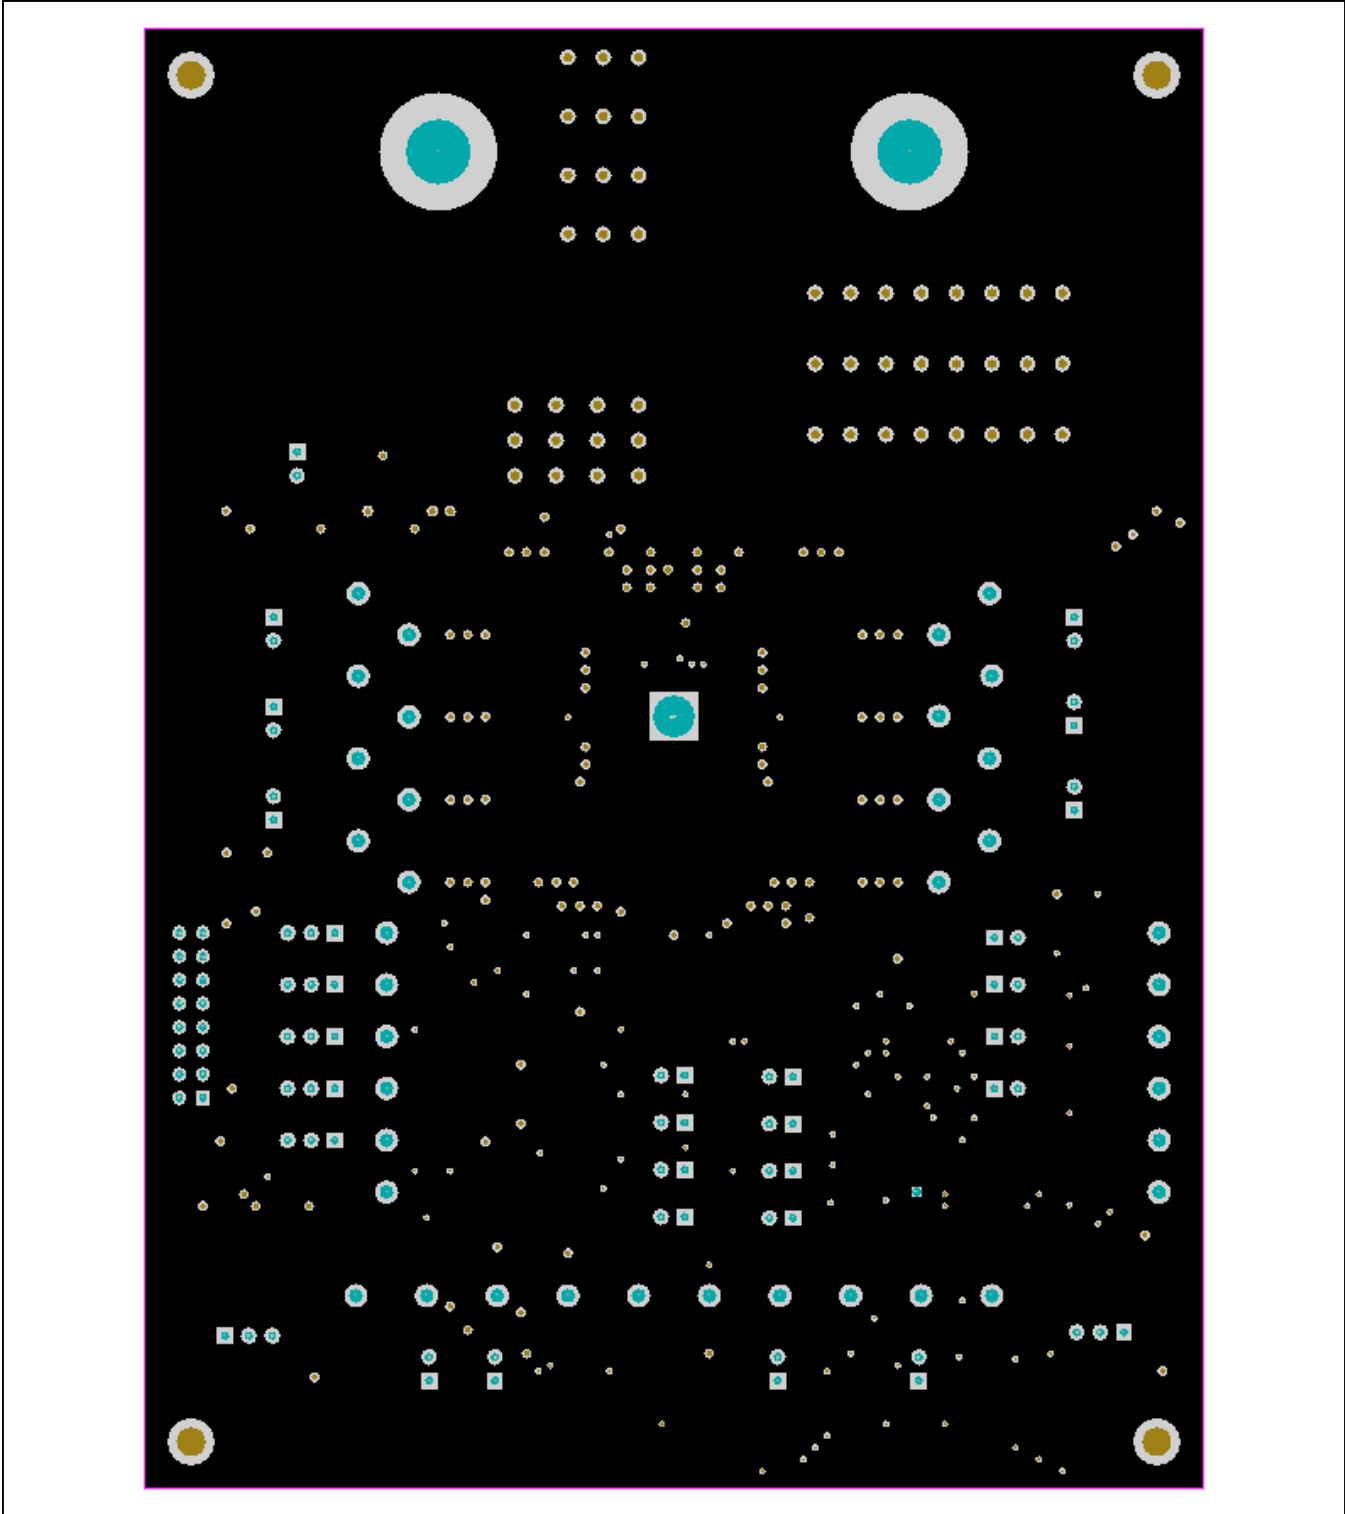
MAX14900E EV Kit PCB Layout, Internal Plane 1—GND
